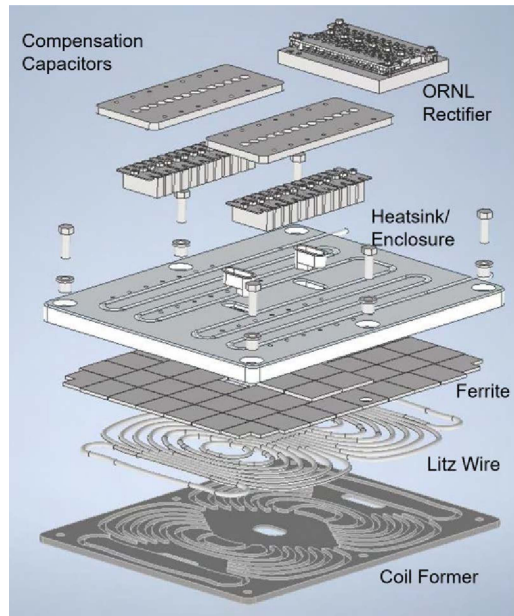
Exploded view of the different layers of the demonstrator coil assembly. Here, the assembly consists (bottom to top) of a polycarbonate cover and coil former, a Litz wire coil, a layer of ferrite, an aluminum enclosure, copper tubing, and the capacitor banks. A sample rectifier designed by ORNL is shown as well for optional mounting in a single-box solution. In the benchtop testing, the rectifier was placed on a separate table for ease of access.
